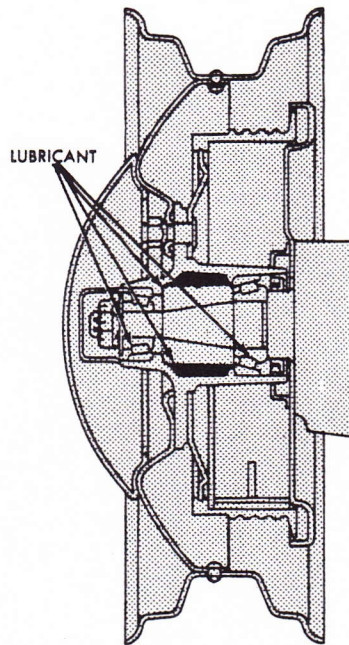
Lubrication Sites on Front Wheel Hub. (Courtesy of Ford Motor Company)
